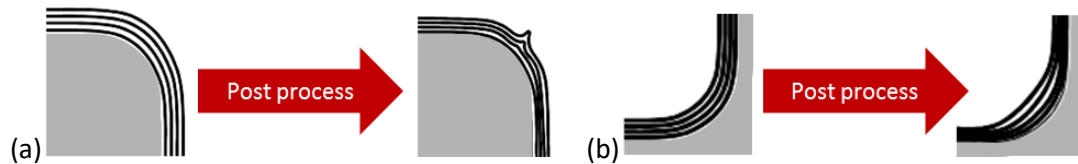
Schematic wrinkle on a convex corner (a), schematic bridging on concave corner (b) [201]
